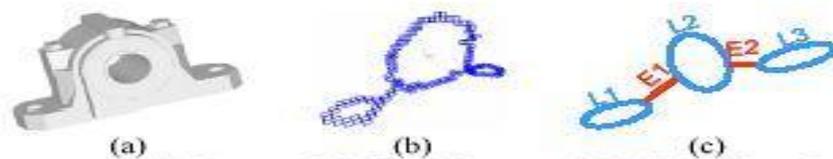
(a) CAD model, (b) Skeleton, and (c) Skeletal graph for a bearing block containing 182 faces
